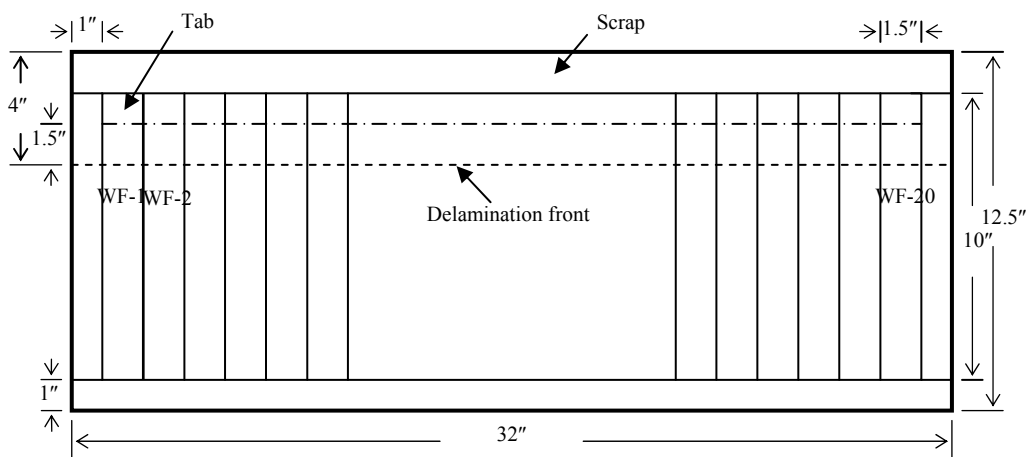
The FGI 1854/Dow 510A-40 Panel and Specimen Layout
